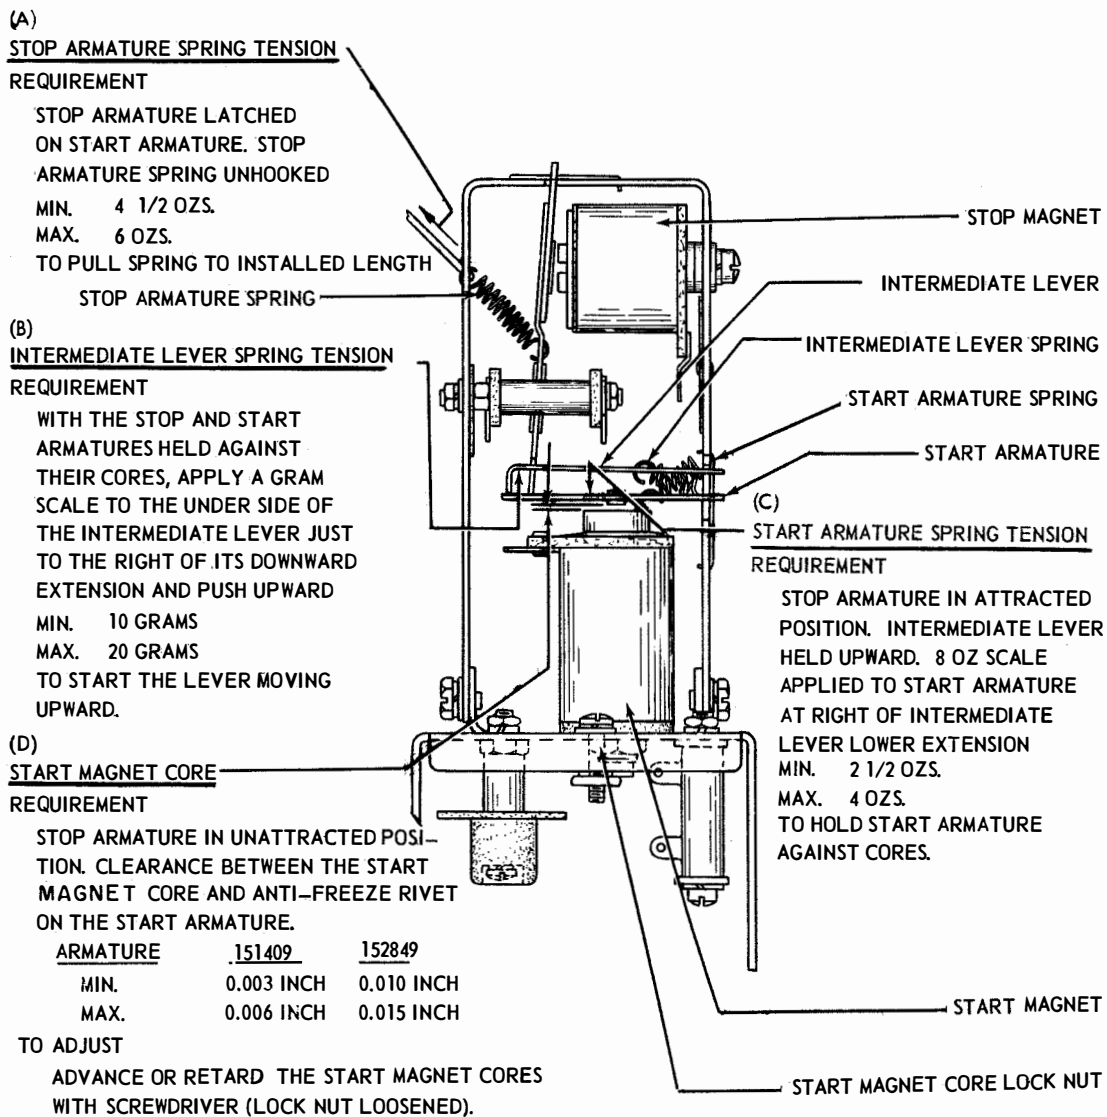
MOTOR CONTROL ASSEMBLY
